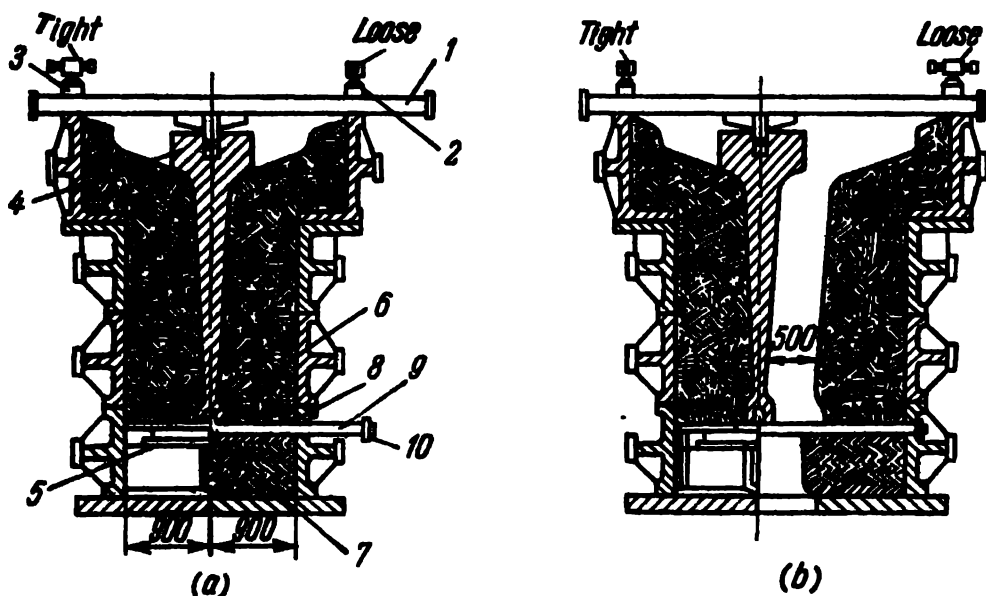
Ready mould for casting hydraulic turbine blades (Kryanin, Dubrovsky):
